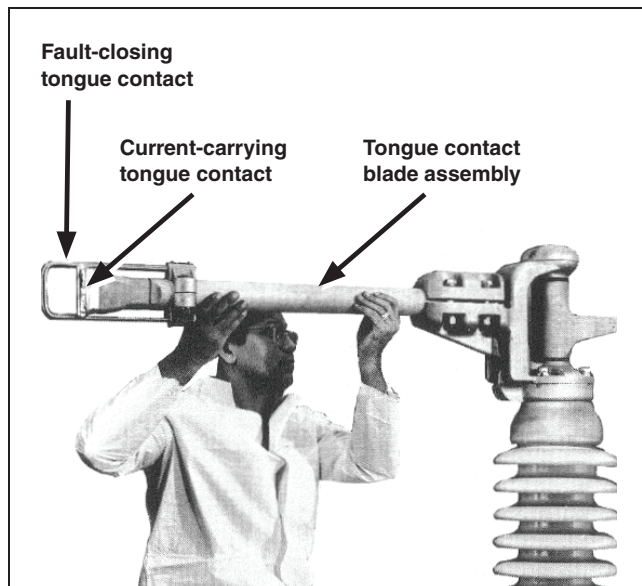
Inserting tongue-contact blade assembly at terminal end (1600 ampere rating shown.)
